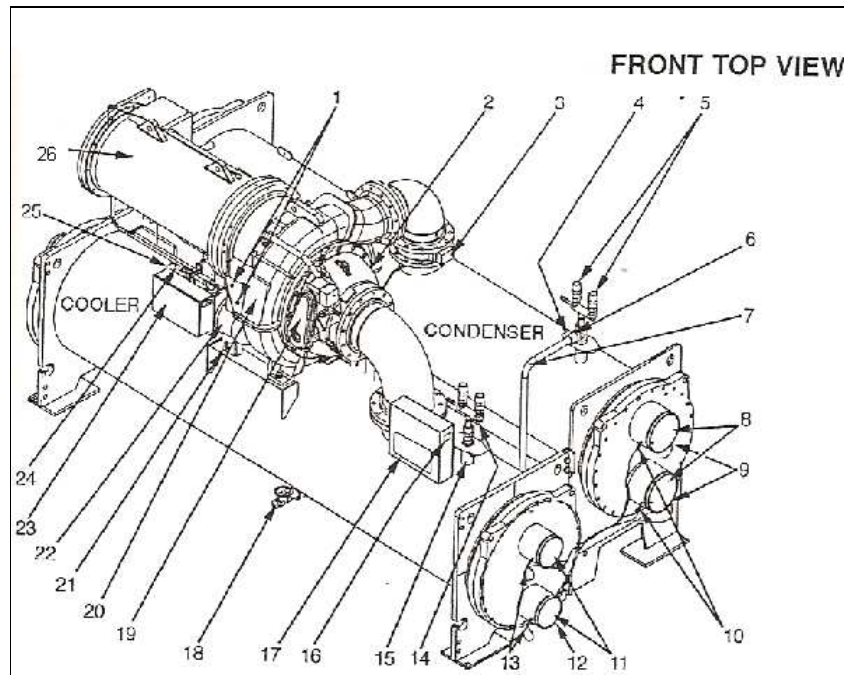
Carrier Centrifugal Machine Set-Up. (Carrier Installation Manual ⁽²³⁾)
